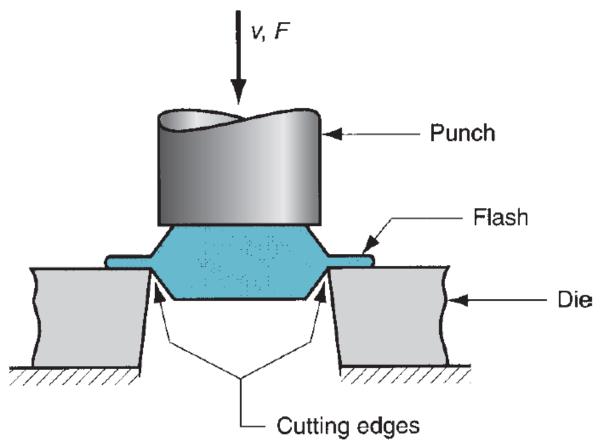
Trimming operation (shearing process) to remove the flash after impression-die forging.
